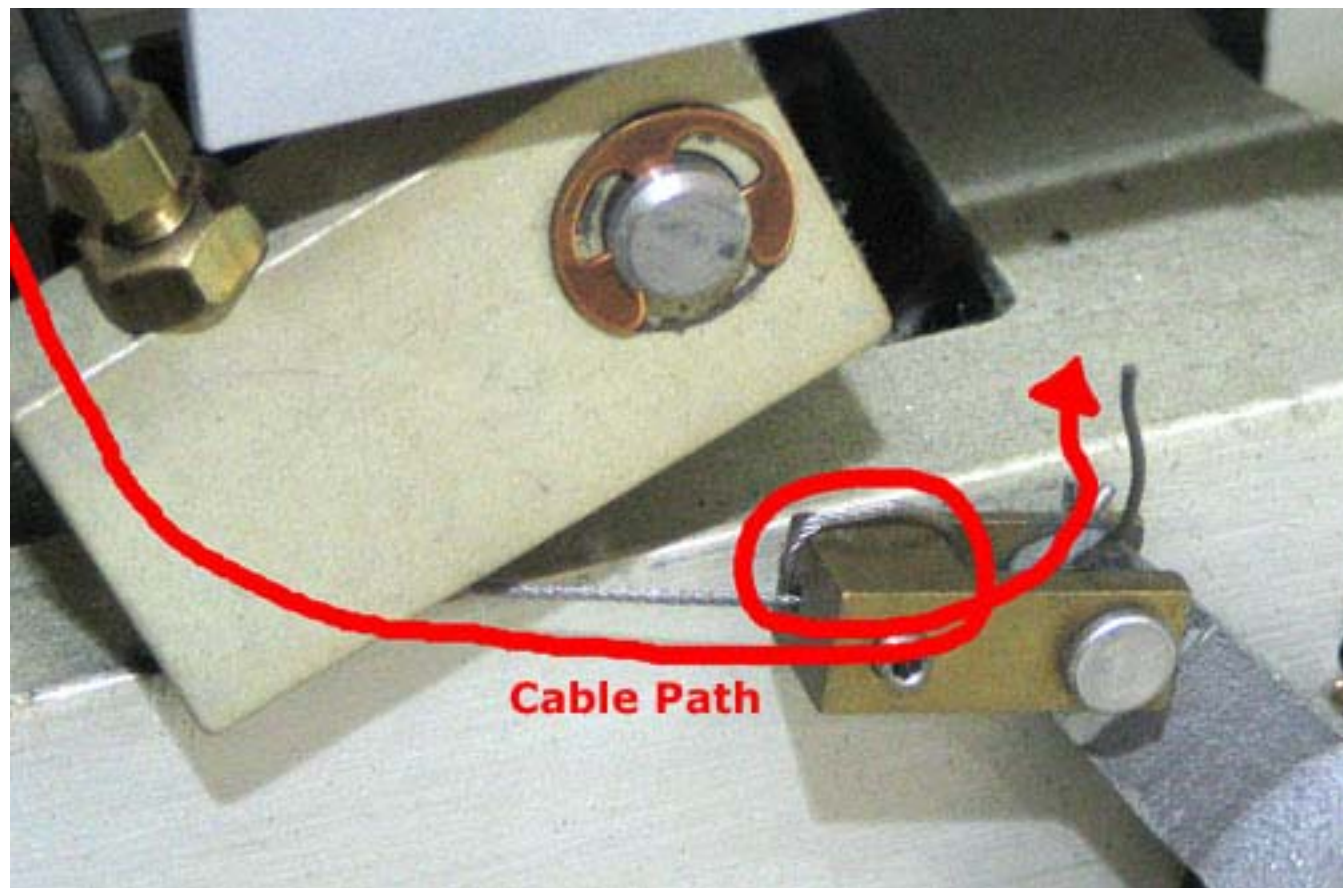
INTERLOCK CABLE AND MAIN CRADLE LATCH CABLE ROUTING
